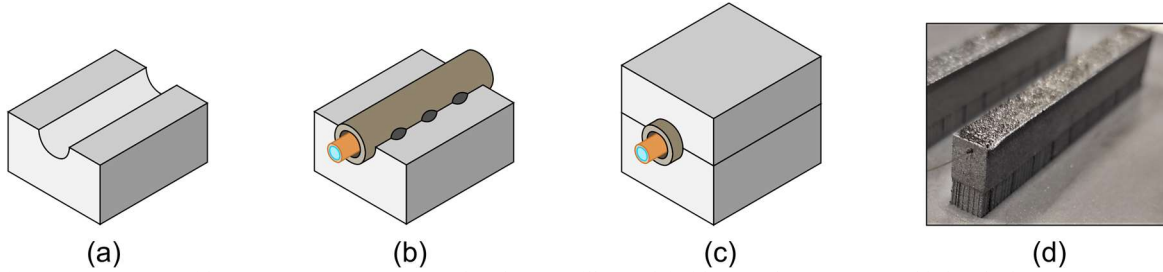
(a) Lower part with  $\text{\O}500\ \mu\text{m}$  groove (not to scale). (b) In-capillary polyimide-coated FBGs array welded to the lower part. (c) Upper part printing for sensor embedding. (d) Finished part after unmelted powder removal.
